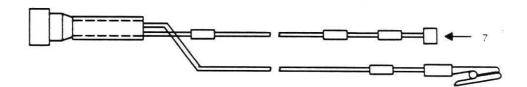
OH-58A/C/D Test Adapter Kit (29316000)
